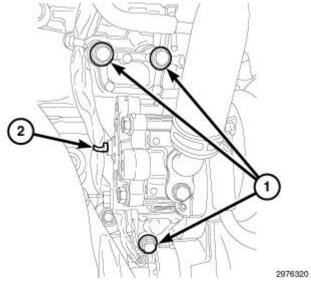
Fuel Tube Securing Bolts & Bracket Courtesy of CHRYSLER GROUP, LLC
